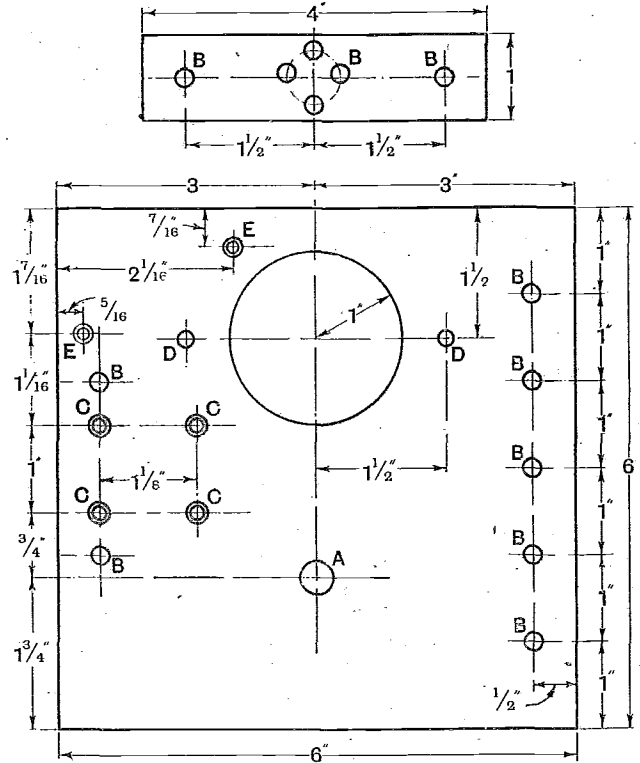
Details of the ebonite panel and valve support. The holes should be drilled as follows: A, $\frac{3}{8}$ in. dia.; B, $\frac{1}{2}$ in. dia.; C, drill $\frac{3}{16}$ in. and countersink; D, $\frac{3}{16}$ in. and tap 2BA; E, drill $\frac{7}{16}$ in. and countersink.
